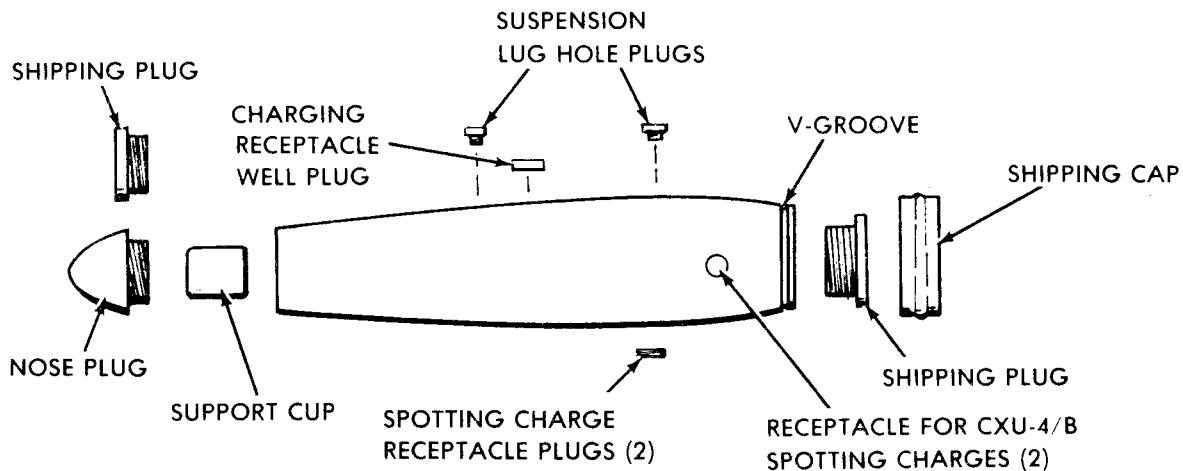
BDU-45/B Practice Bomb — Exploded View (Shipping Configuration)
